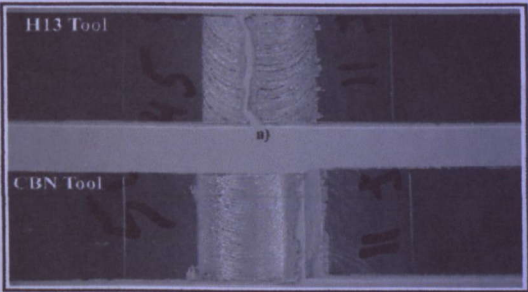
Tensile failure locations of H13 tool and CBN tool [7]
